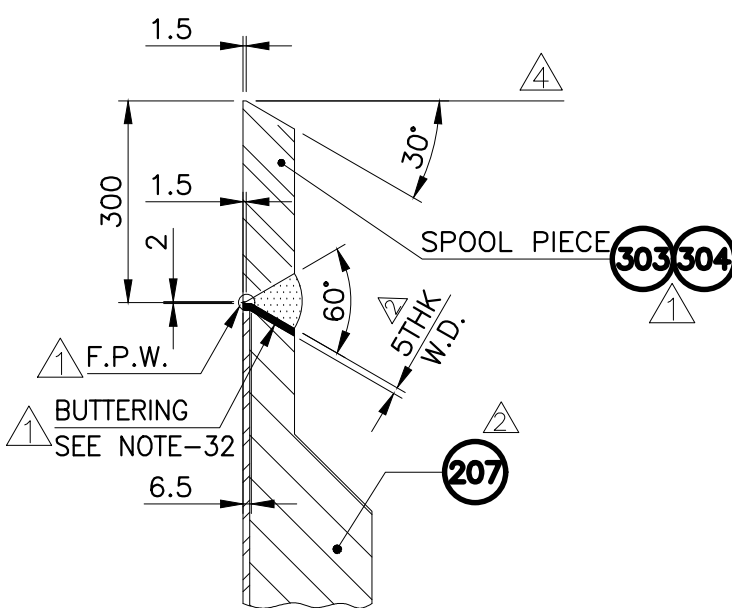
DETAIL OF SHELL FLG. TO SHELL WELD
